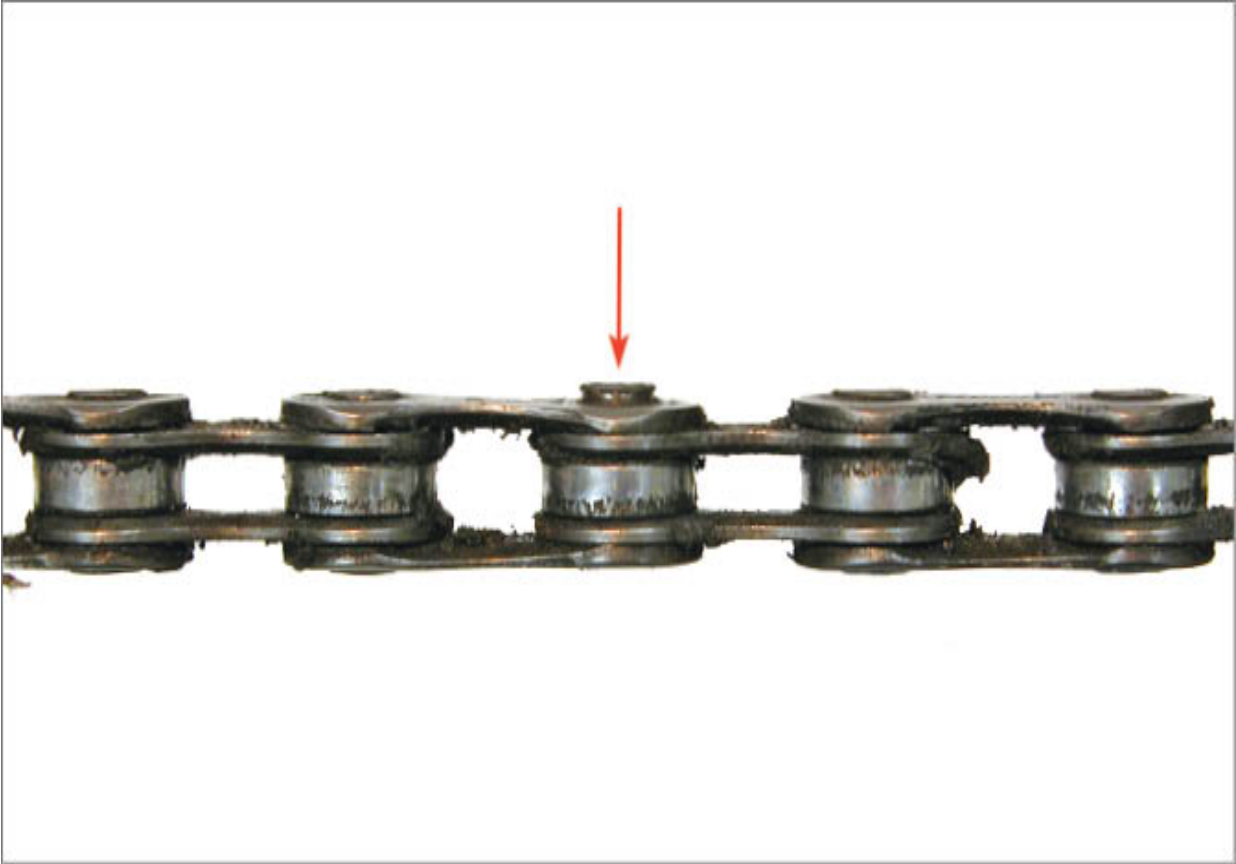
A poorly centered rivet that will fail under heavy use
